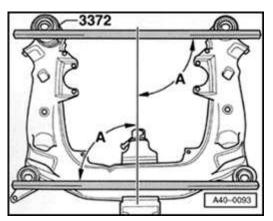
Aligning Bonded Rubber Mounting Courtesy of VOLKSWAGEN UNITED STATES, INC.
